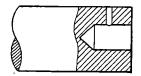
Large-section blank machined in order to be welded on a machine of insufficient rating
